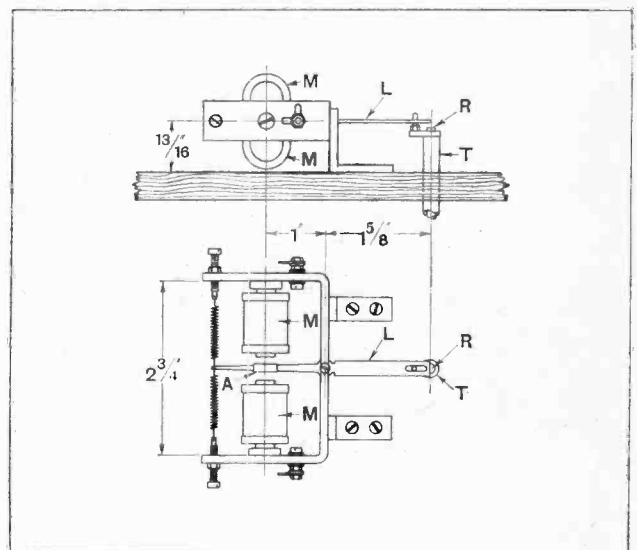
Dimensions of the steering gear. M = magnets, A = armature, L = steering lever, R = rudder shaft, T = rudder tube.
